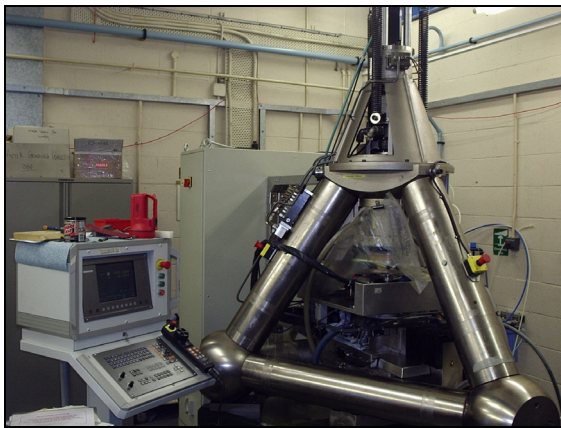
Precision Machine Tool at Cranfield (TetraForm C)
